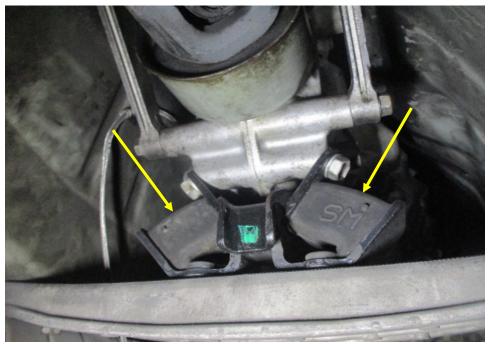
shows another view of the rubber bushing (arrowed), sitting between the transmission assembly and the bracket (rear to front view). The rubber bushing absorbs any vibrations arising from the rotation of the transmission gears, minimising any stress to the bracket.
